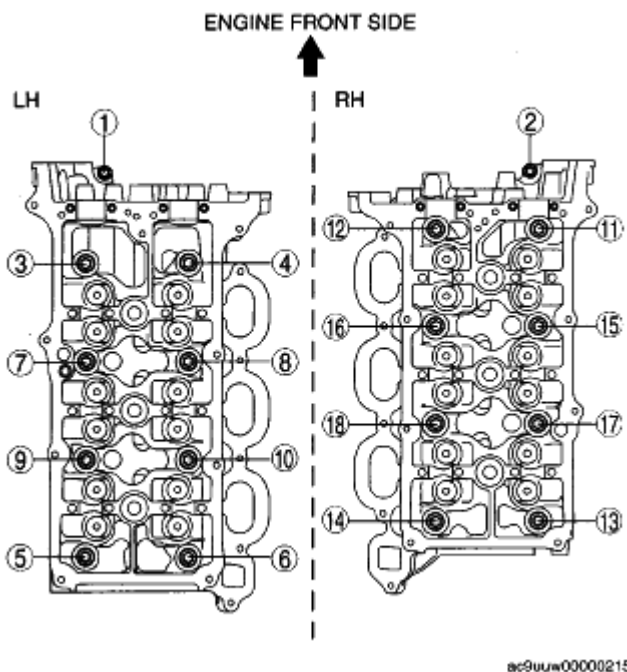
Identifying RH Camshaft Cap Bolts Removal Sequence
